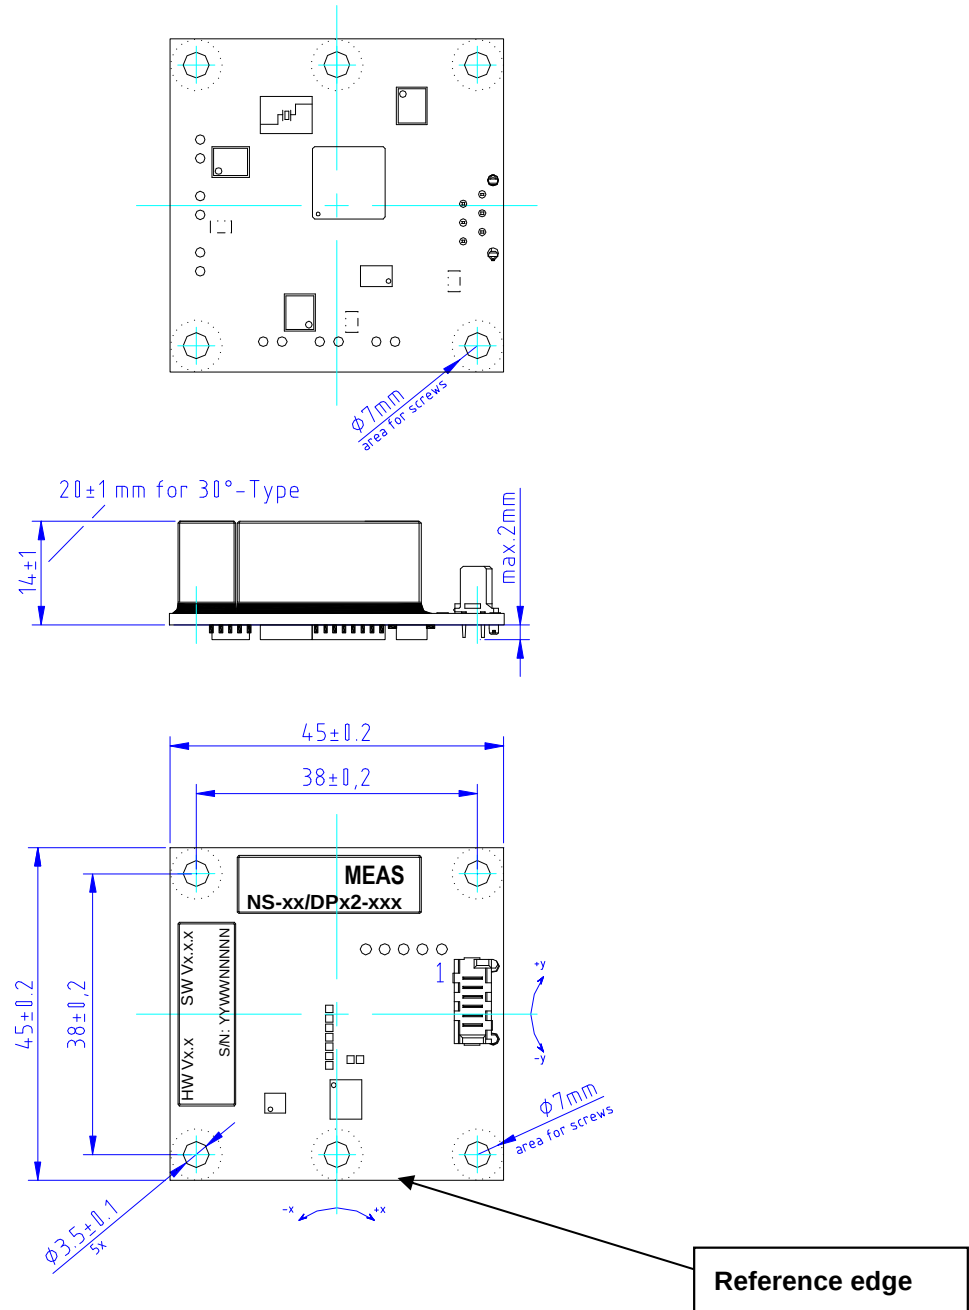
Top view, cross sectional and bottom view (top-down) of the board with dimensions and placement of the connector
